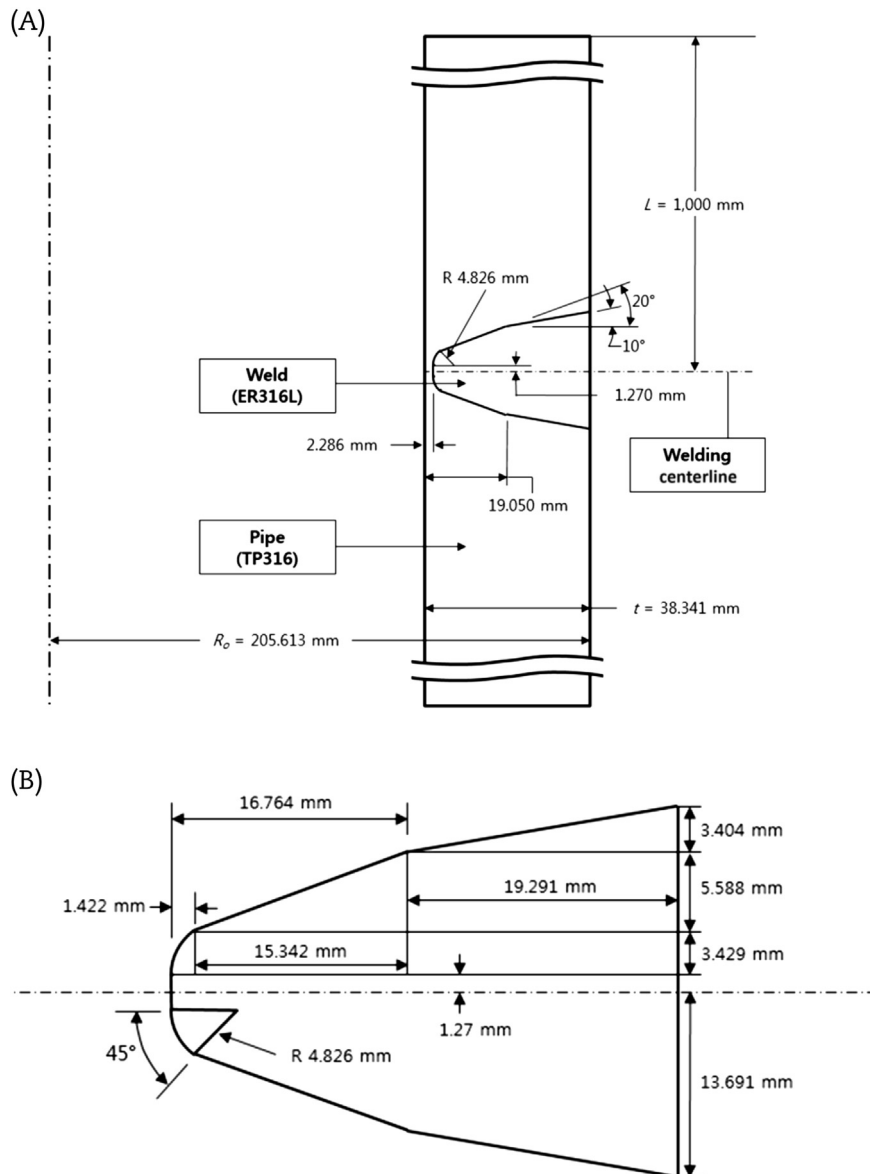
Schematics of an ASS pipe and its weldment [14]. (A) Geometry of an ASS pipe. (B) Enlarged geometry of a weldment. ASS, austenitic stainless steel.
